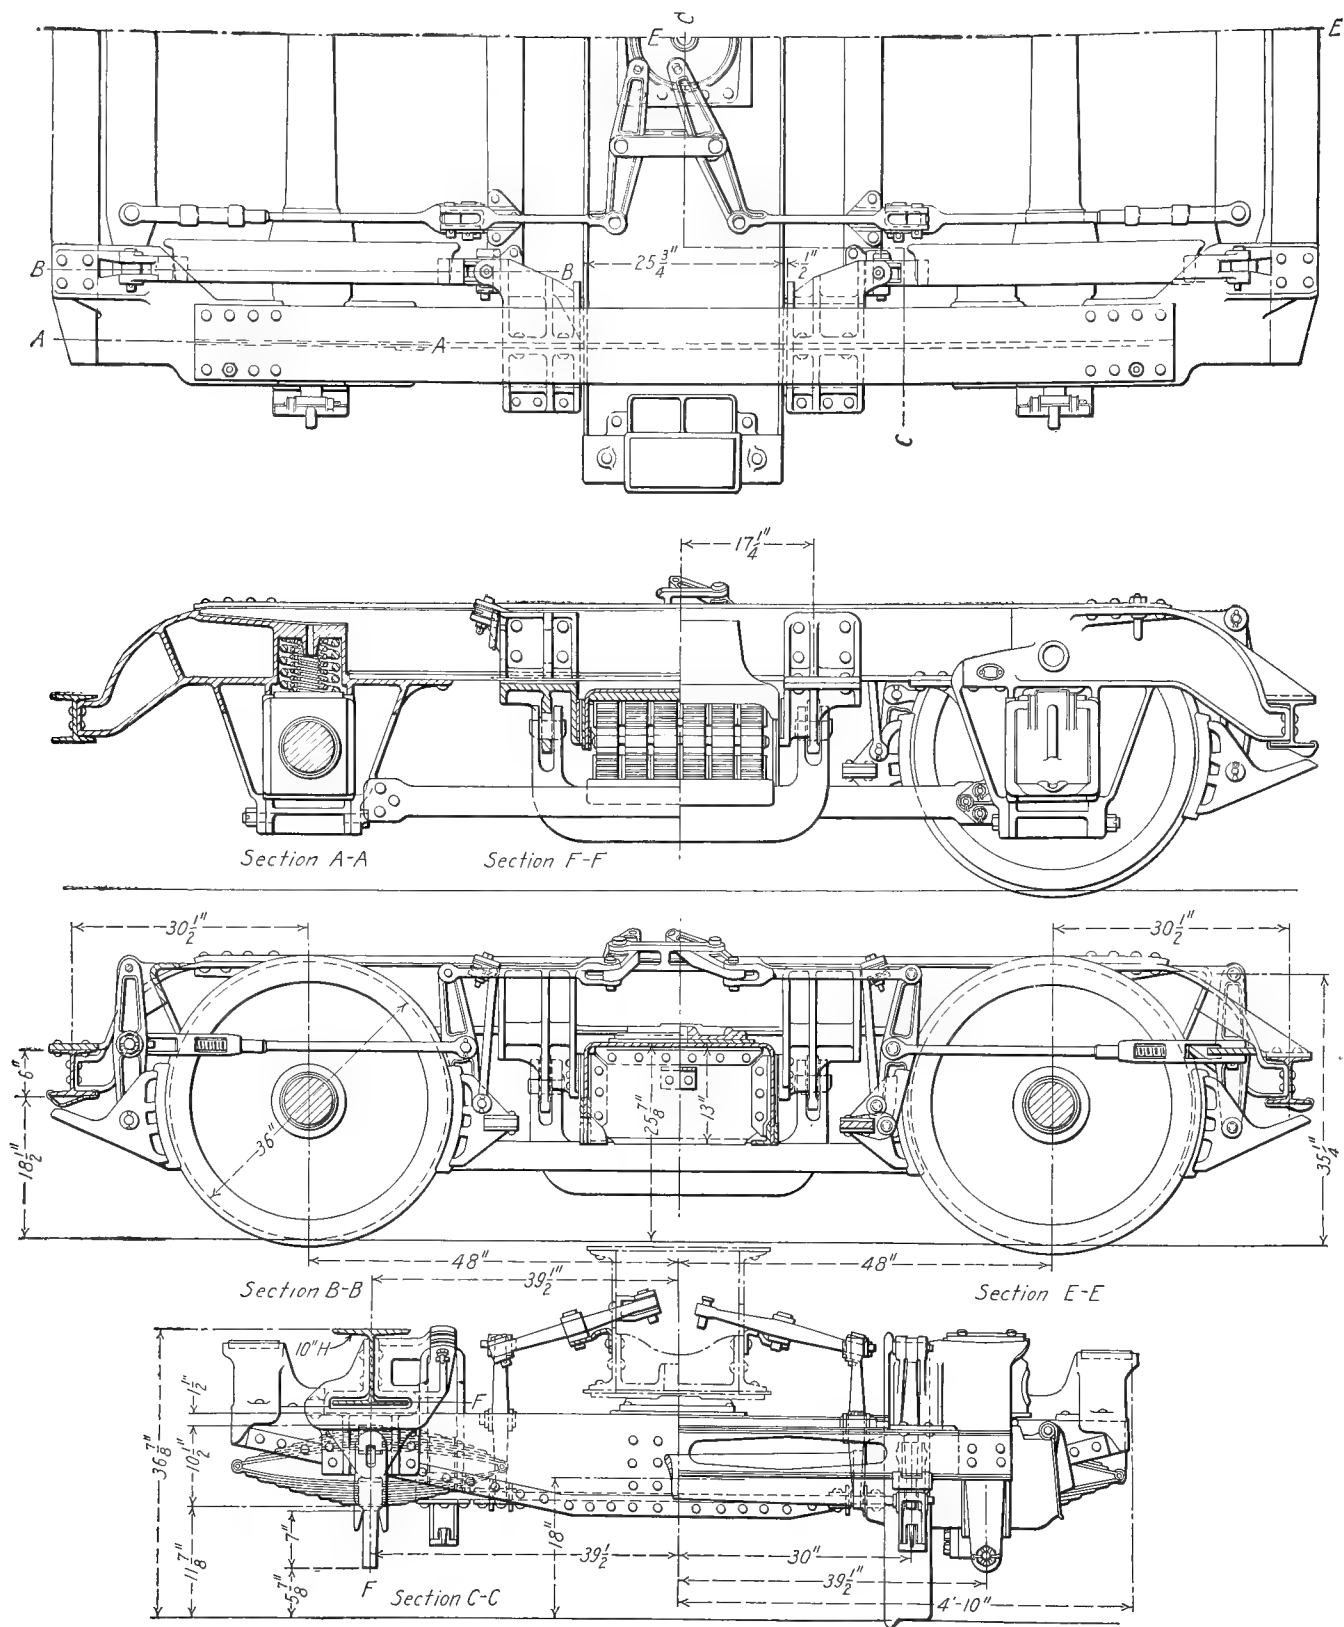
Present Standard Four-Wheel Steel Passenger Truck Used on the Pennsylvania Railroad.
